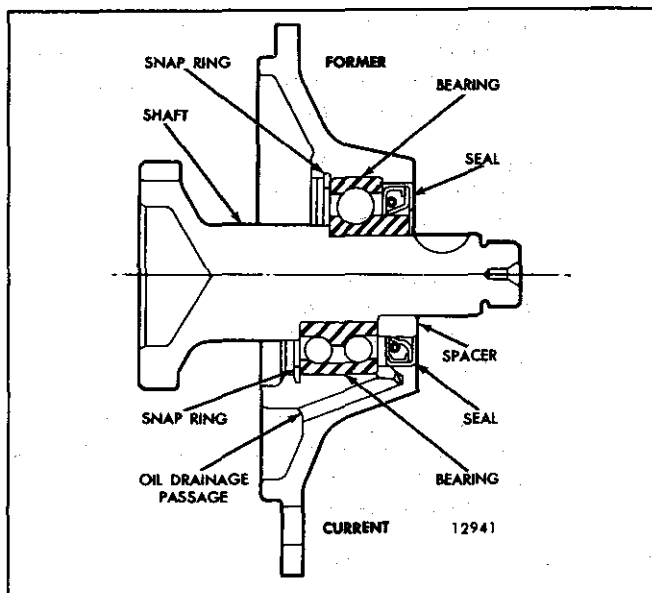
Former and Current Drive Plate Type Accessory Drive
